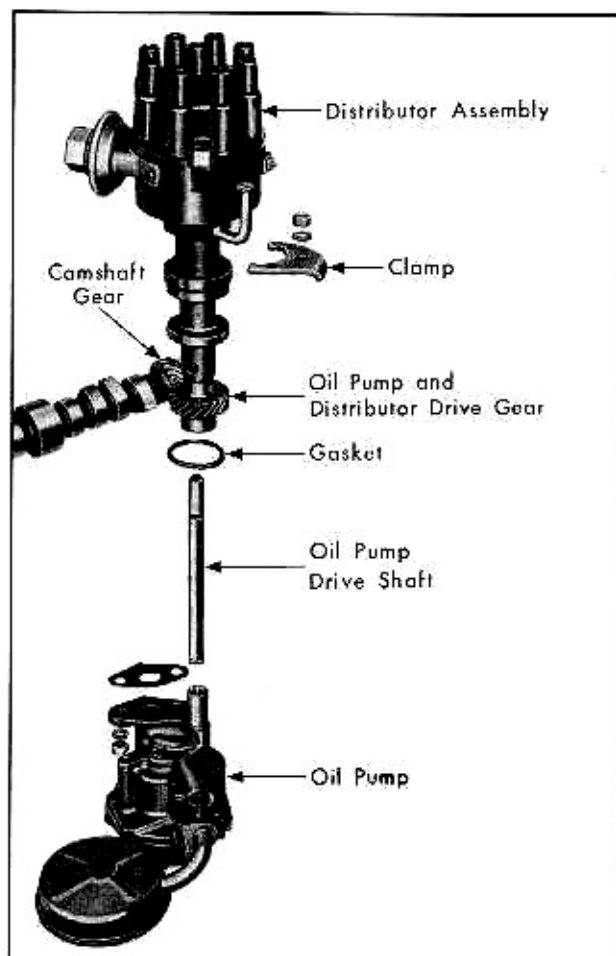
Distributor and Oil Pump Drive Mechanism
